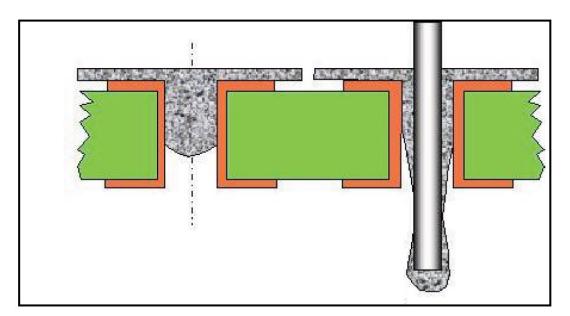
Illustration No. 2 – Soldering of a TH component on the SMT automatic assembly line The solder paste traverses through the hole on the PCB and solders the pin of the TH component
